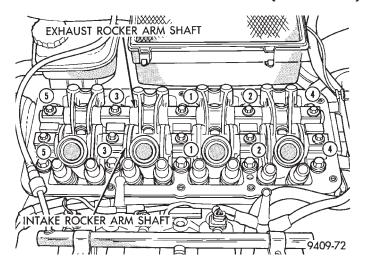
Rocker Arm Shaft Tightening Sequence VALVE SEALS AND SPRINGS—IN VEHICLE
